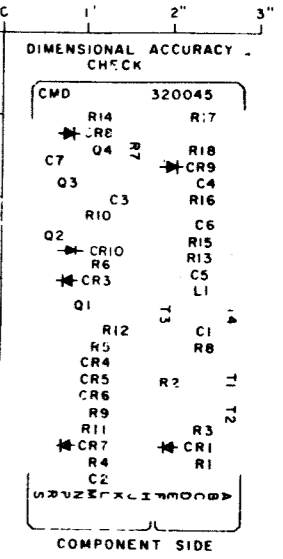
Clutch Magnet Driver 321991 (Sheet 2 of 2)
